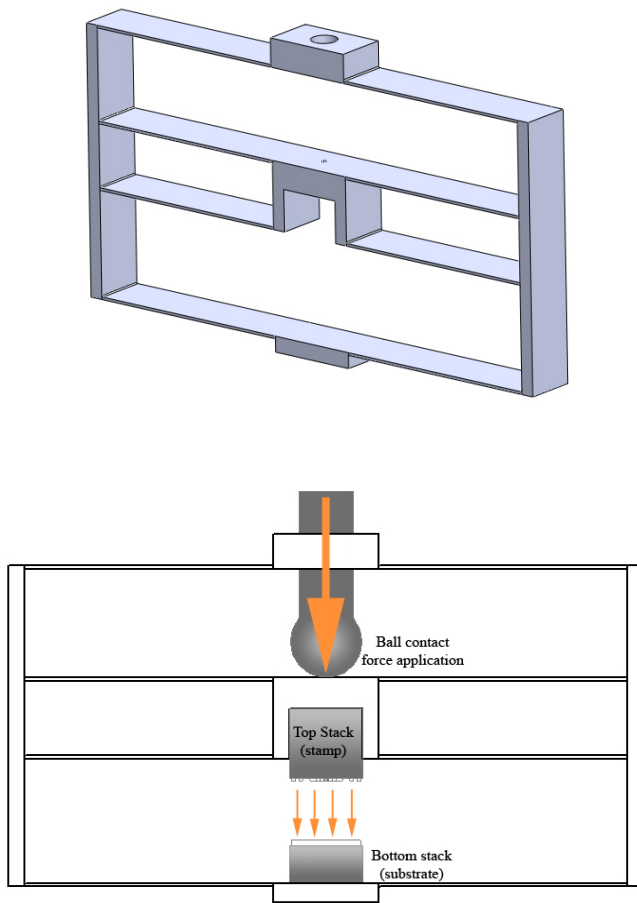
Flexural Bearing Design: Shown here are the flexure design (top) and a schematic of how this design would be incorporated into a forming machine (bottom). In this design, the tool was intended to be mounted facing downward on the center stage, and the facing platen mounted on the base at the bottom of the flexure. A shaft passing through the opening at the top would apply a force to the top of the stage during forming.
